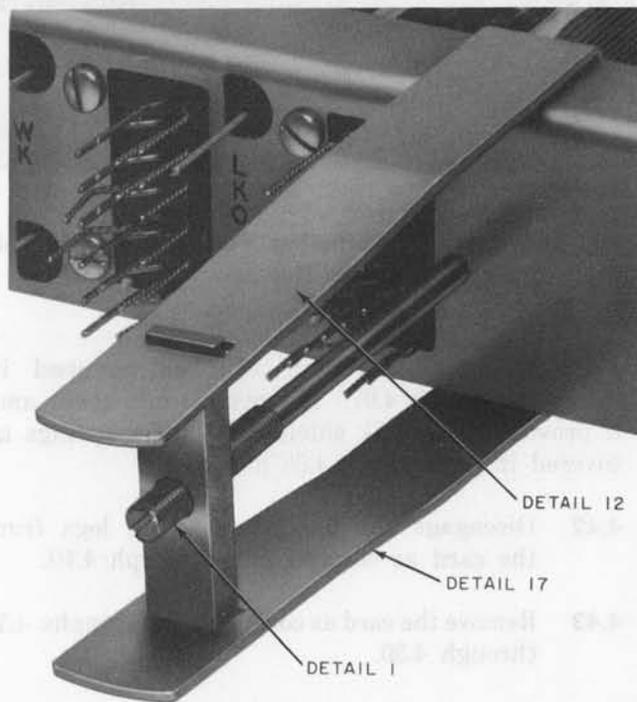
Detail 12 Wedge Support, Detail 17 Wedge Support, and Detail 1 Wedge Support Assembly
